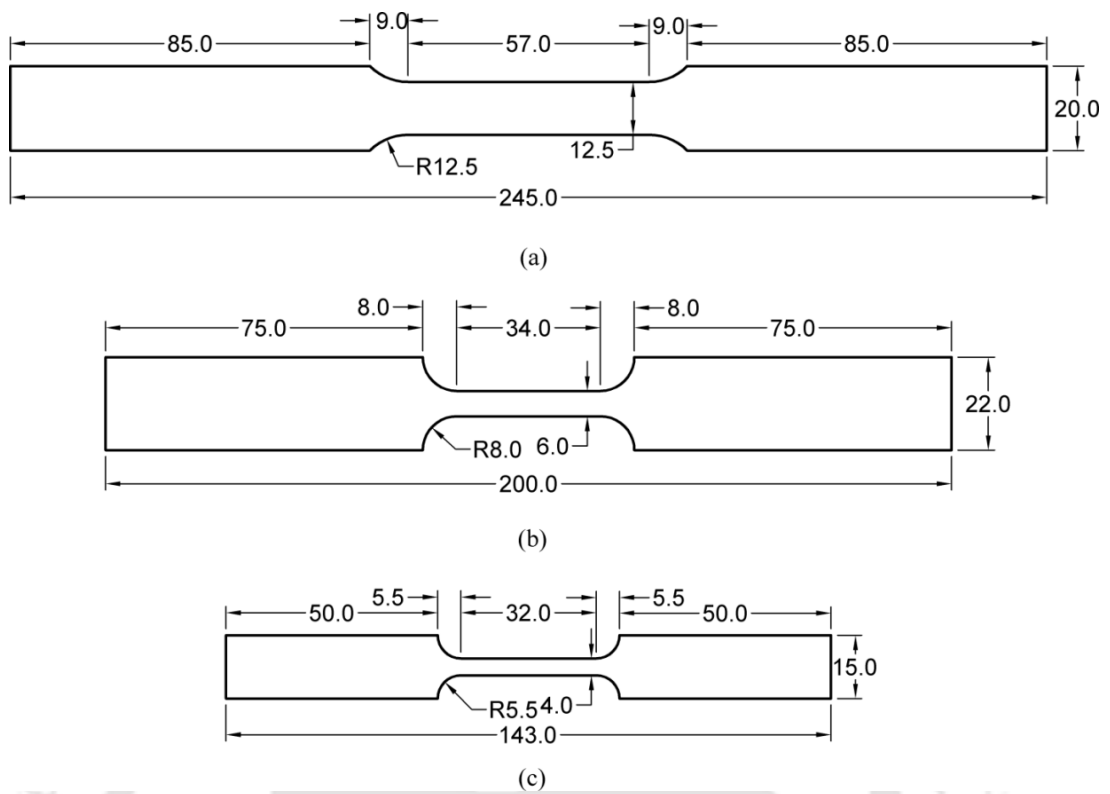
Dimensions (mm) of: (a) flat, (b) corner and (c) weld coupon specimens
